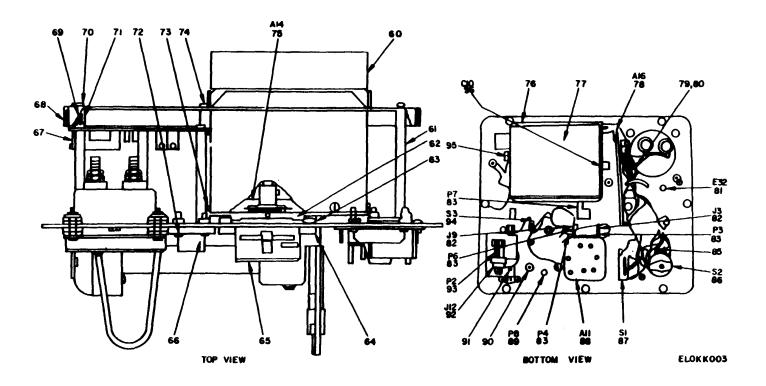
Top Plate Assembly (Sheet 2 of 2).
